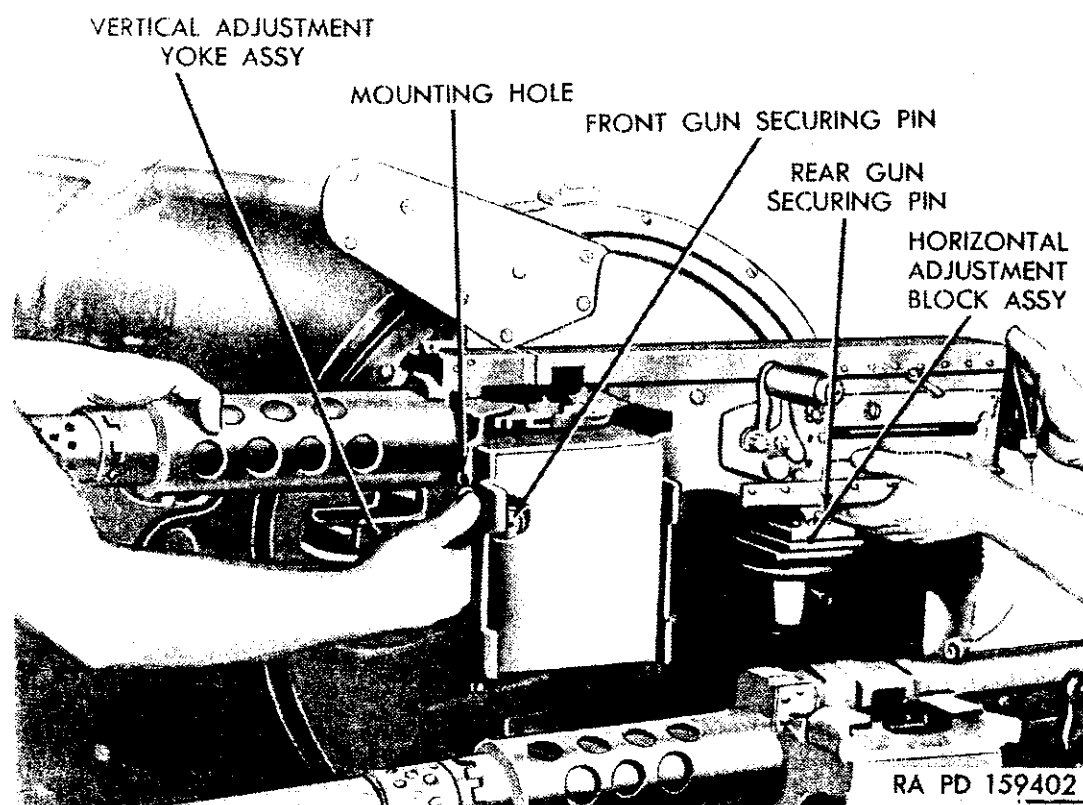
Cal. 50 Browning machine gun M2 mounted on mount M15.
